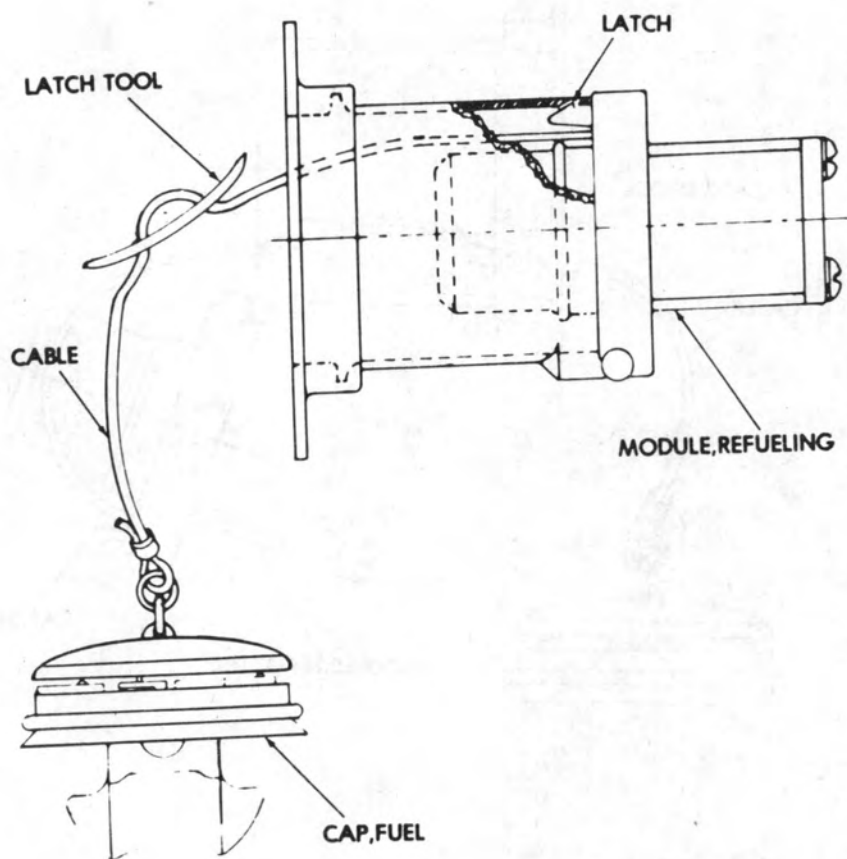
Receiver and Cap Assembly (View in closed and locked position)
